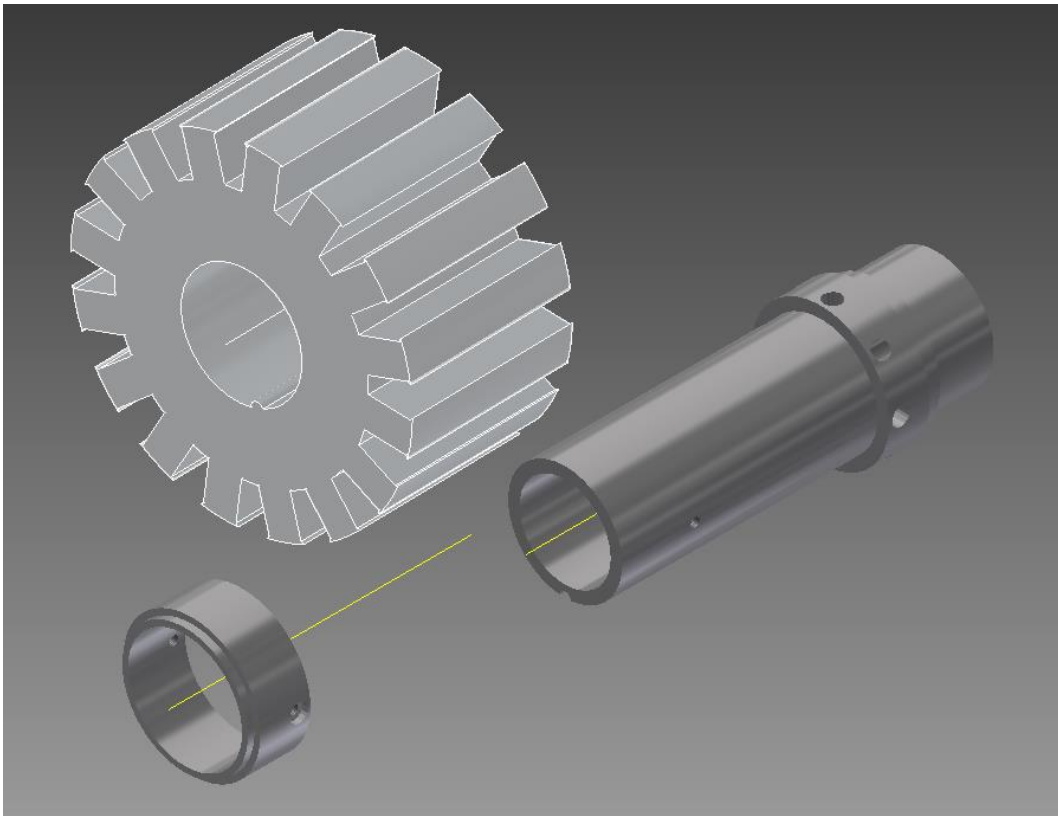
The assembly view of the inner stator and shaft in Autodesk Inventor
